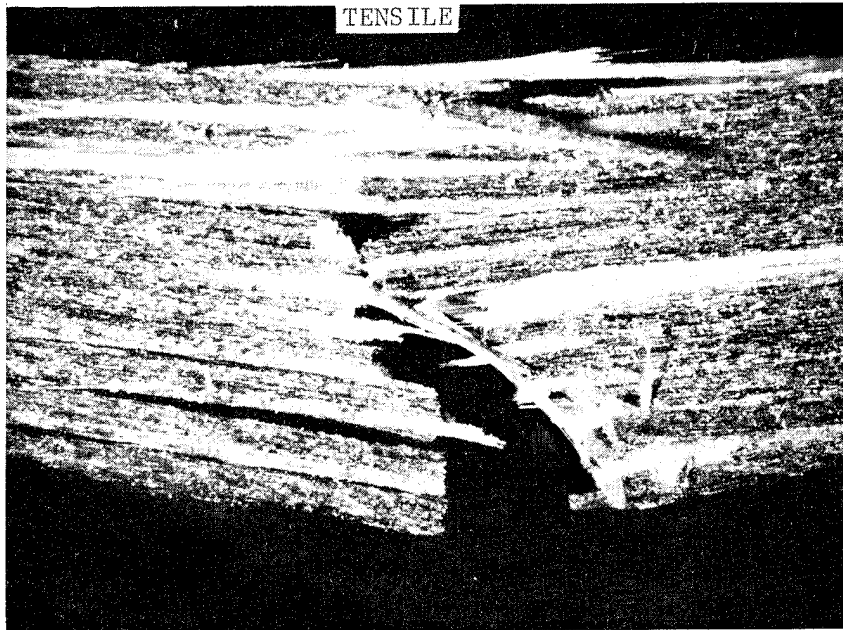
18X EDGE-VIEW OF IMPACT FRACTURE AREA OF PANEL #19 THORNEL 400/S2 GLASS
